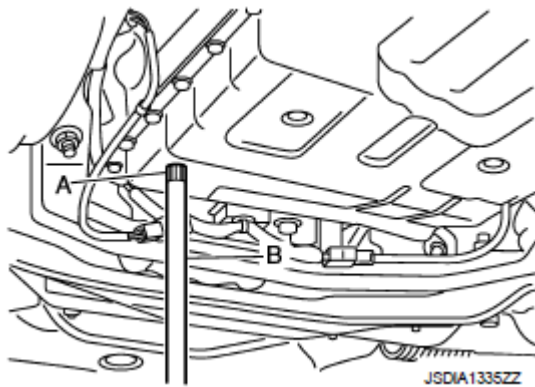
Installing Charging Pipe To Overflow Plug Hole
